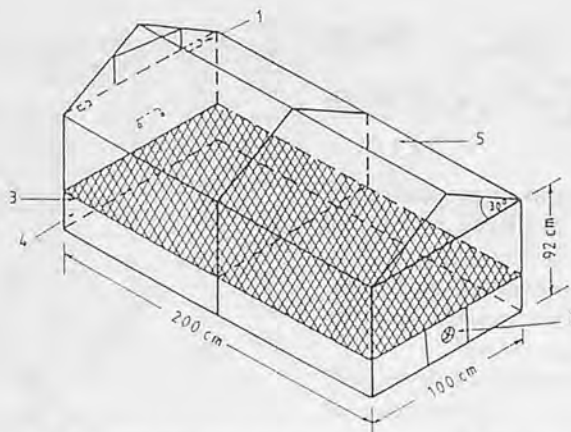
Structure of a solar air heater (solar dryer). 1. Window (air intake); 2. Extracted fan; 3. Wire netted floor; 4. Air chamber; 5. Fiber glass cover.
